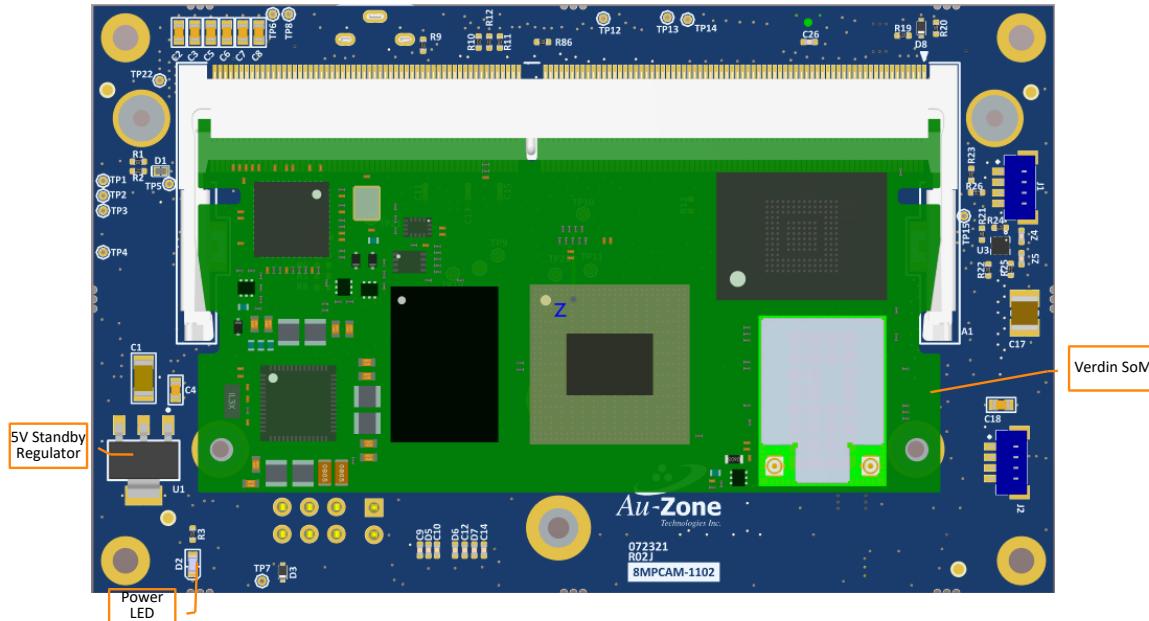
CPU BOTTOM COMPONENT BLOCKS
